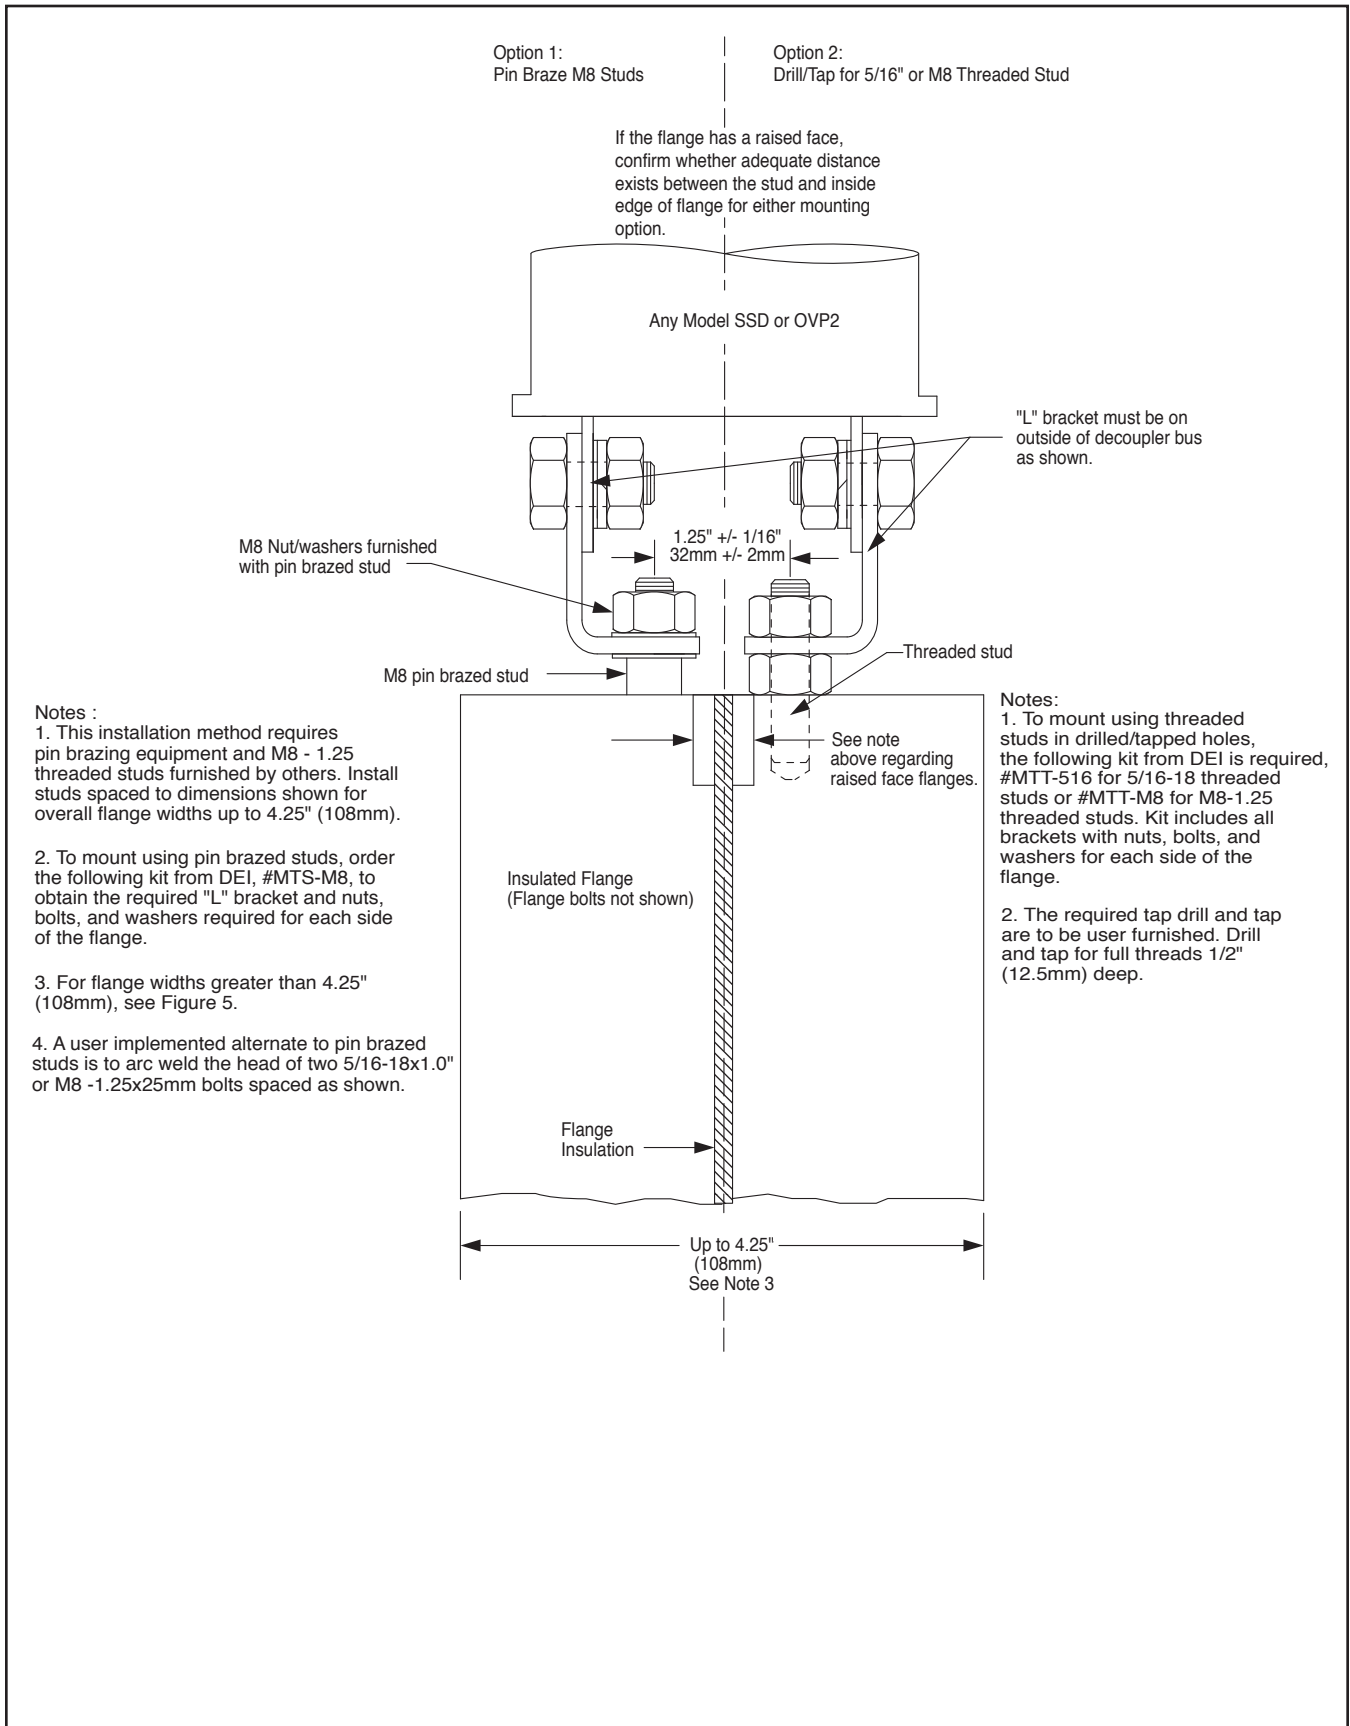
Flange Mount Using Tapped Holes or Pin Brazed Studs
